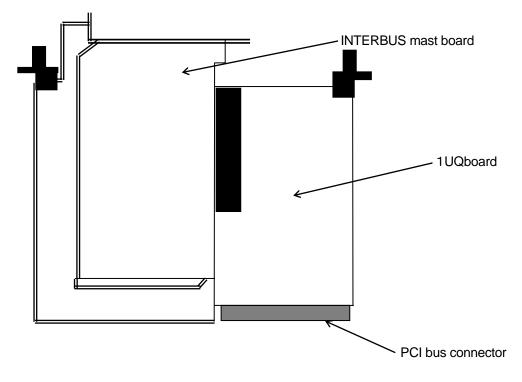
Interface board with INTERBUS master and PCI bus mother board connected (Front view)
